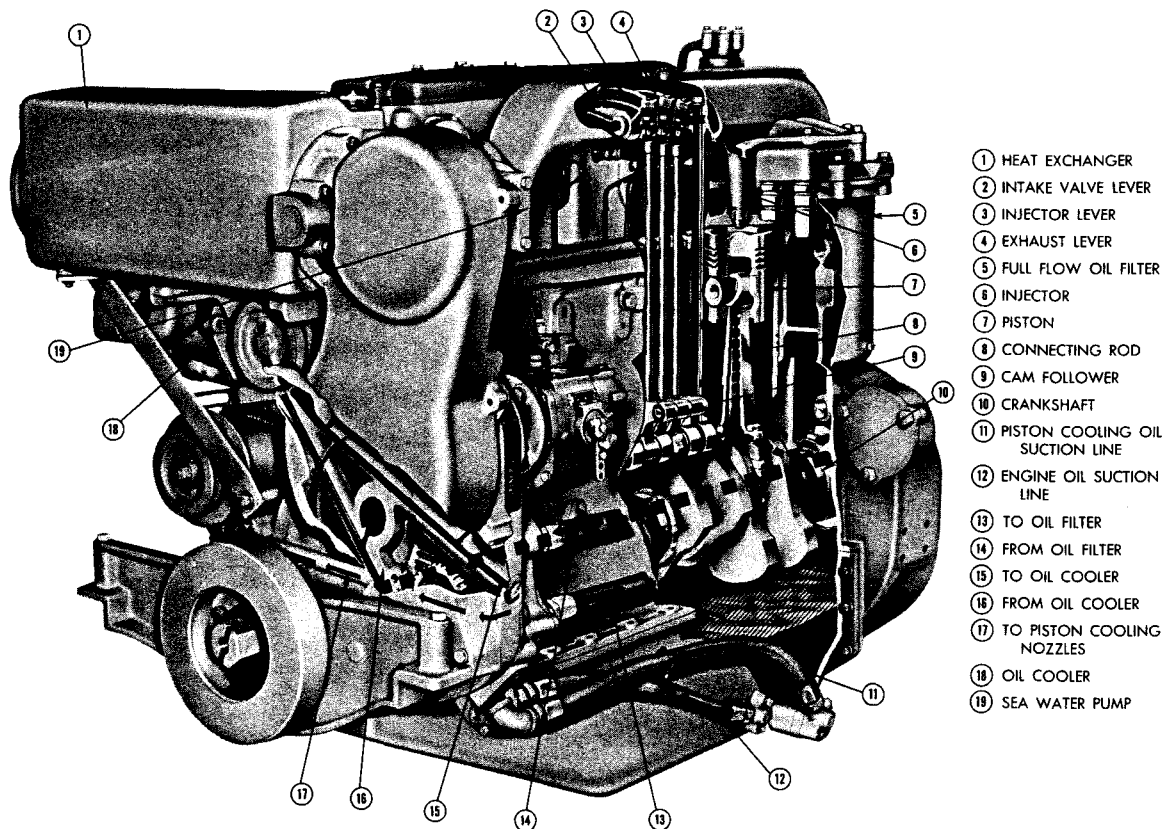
, (LWC-9). Lubricating oil flow — NH, NT Engines
